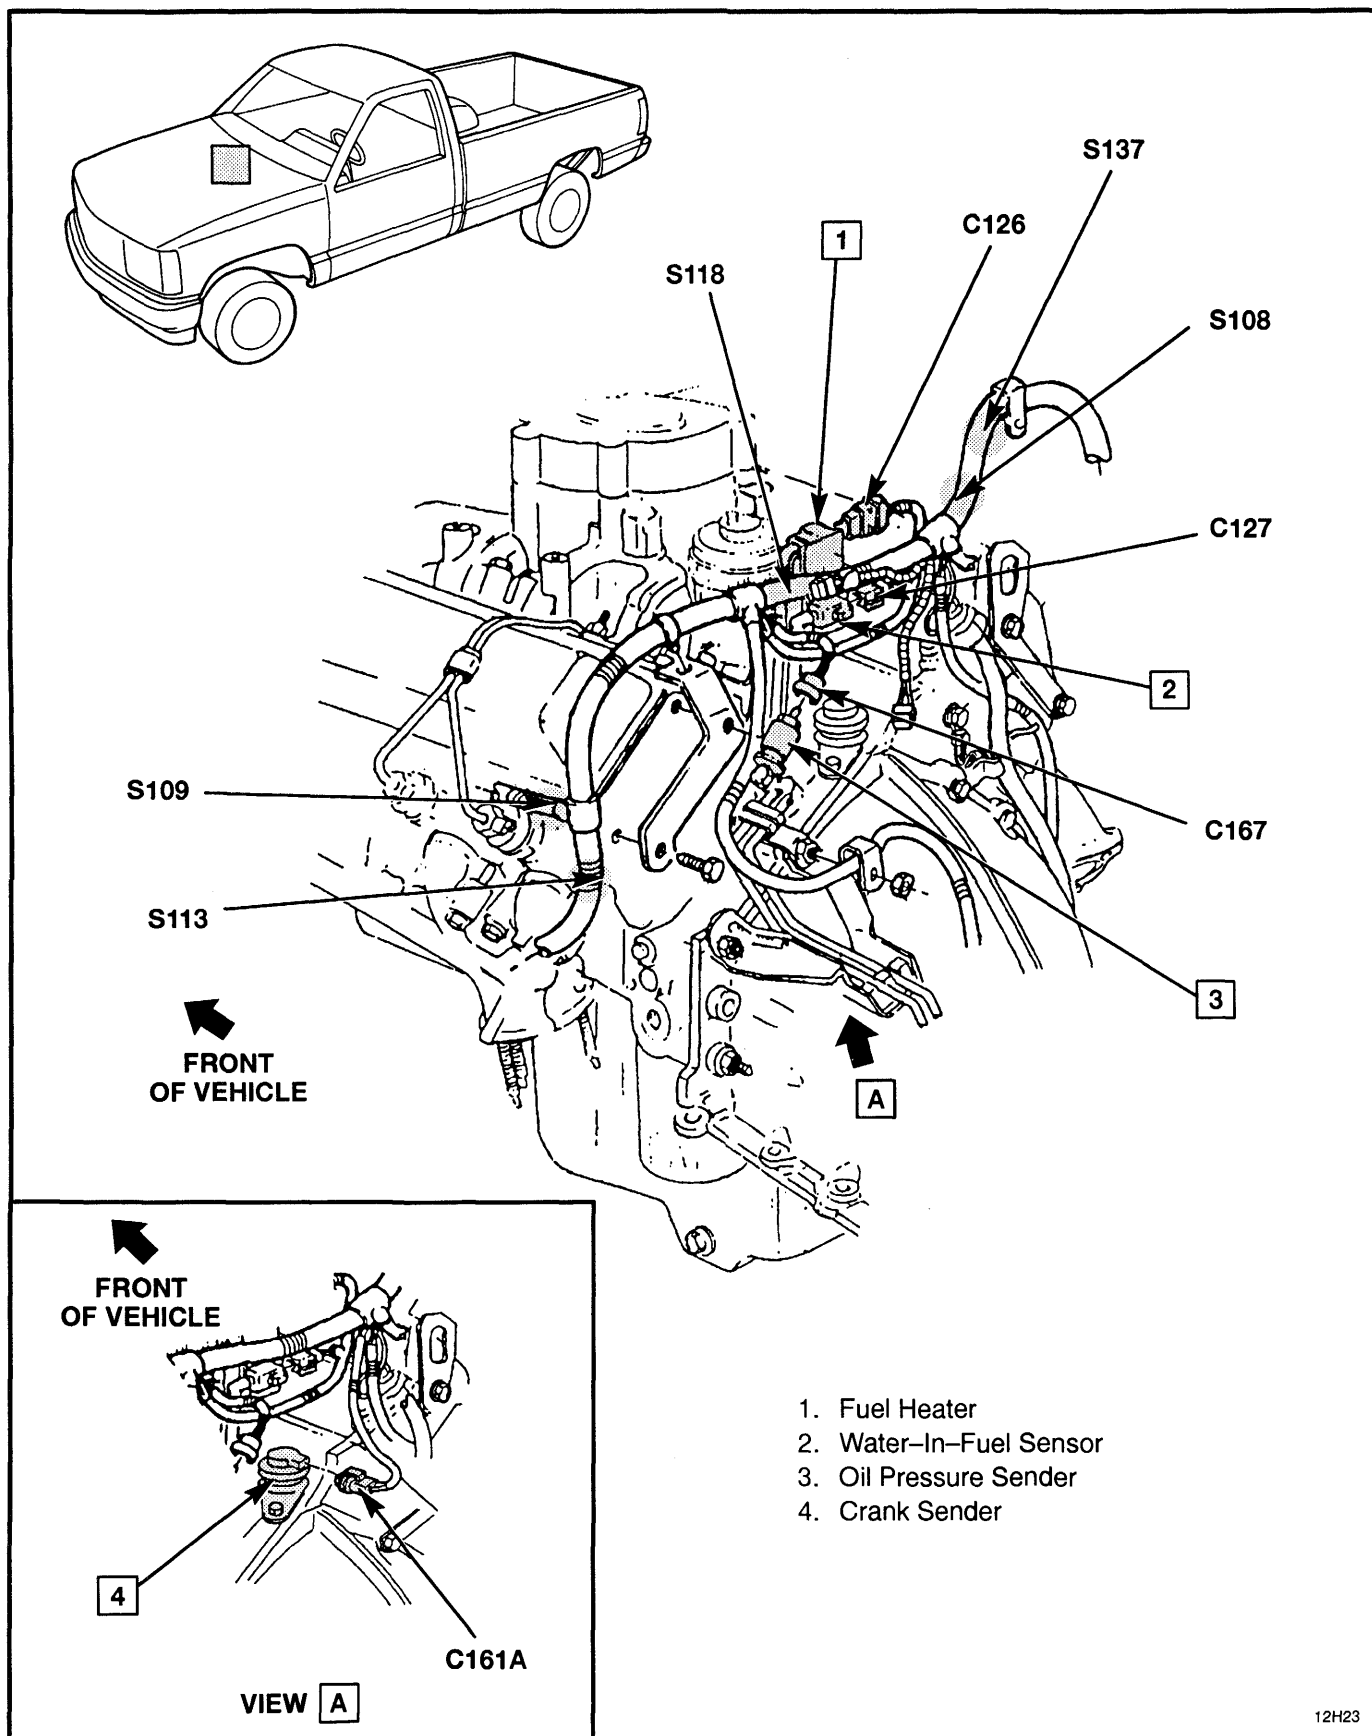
6.5L Diesel Engine Wiring, Rear
